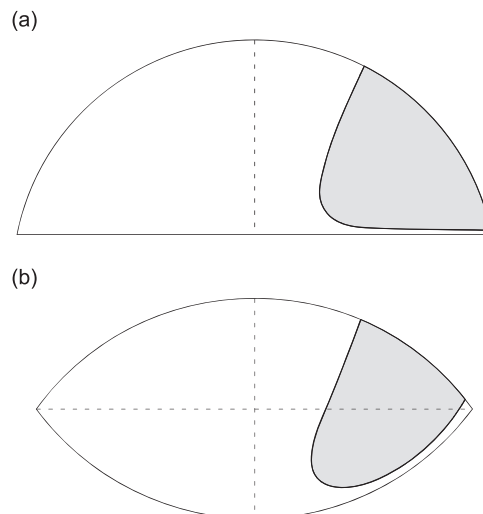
Contact area between crack surfaces when the shaft is loaded in torsion: (a) straight front crack and (b) curved front crack.
